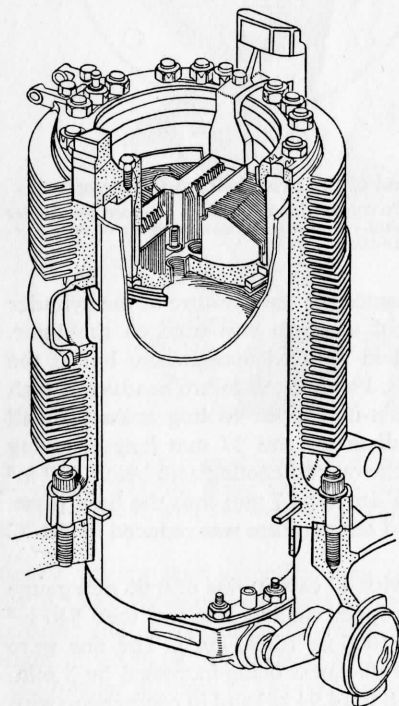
Final design of the cylinder head of the Bristol sleeve valve engine.
